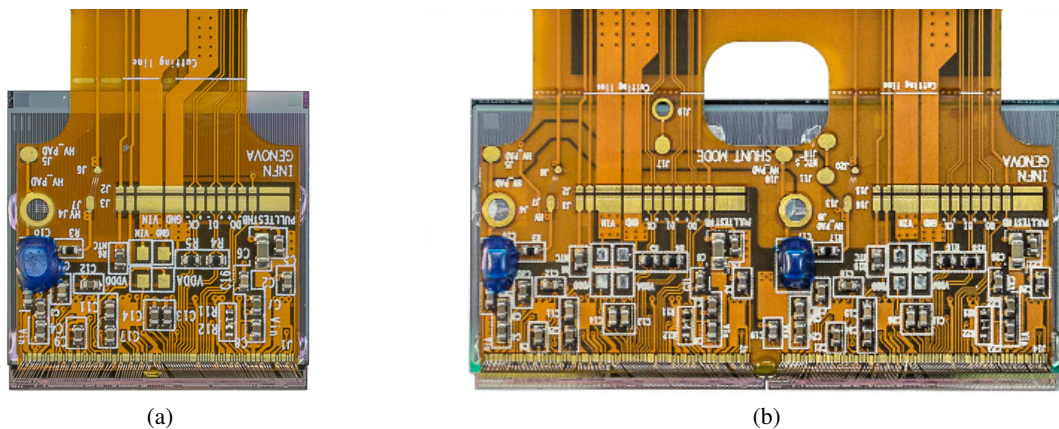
Photo of a dressed IBL single chip module (a) and a double chip module (b). The flex extension called pigtail is present to allow testing of the module prior to the loading of the module on the stave and is cut during the stave loading procedure at the indicated cutting line.
